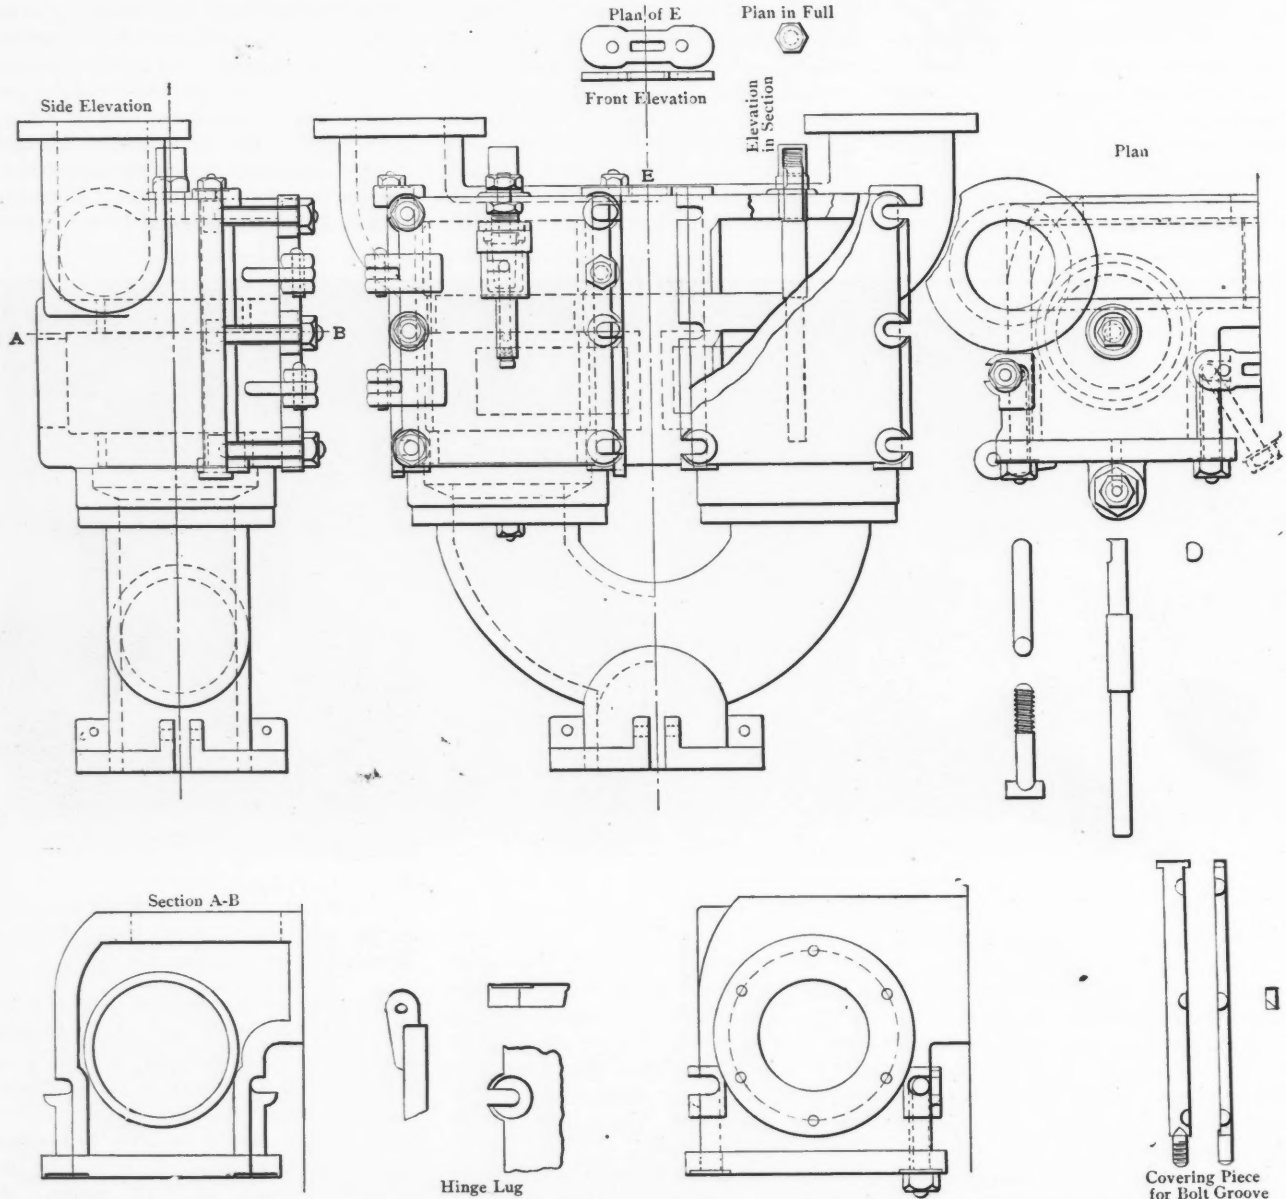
ILLUSTRATING DETAILS OF WATER-VALVE CHEST FOR SINKING PUMP
